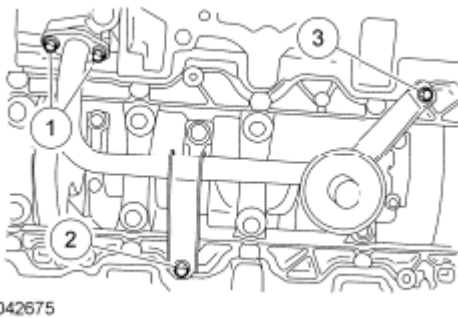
Identifying Oil Pump Pickup Tube With Bolts
